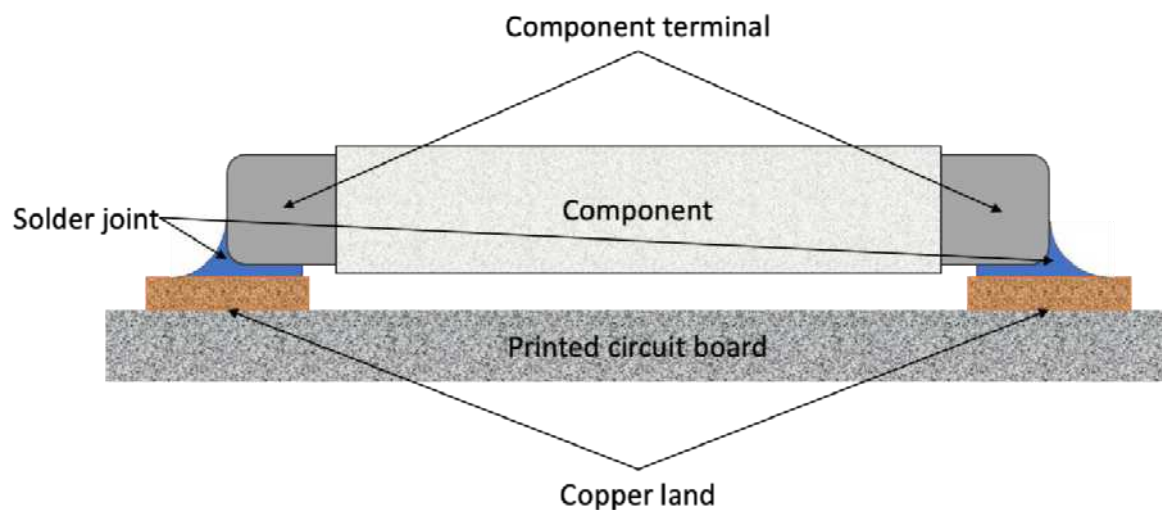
Typical SMD component mounted on a PCB with a rigid lap joint
